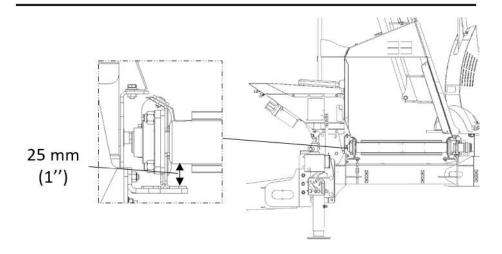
Clearance Between the Conveyor Belt and Frame for the SMARTMIX with Horizontal Conveyor
